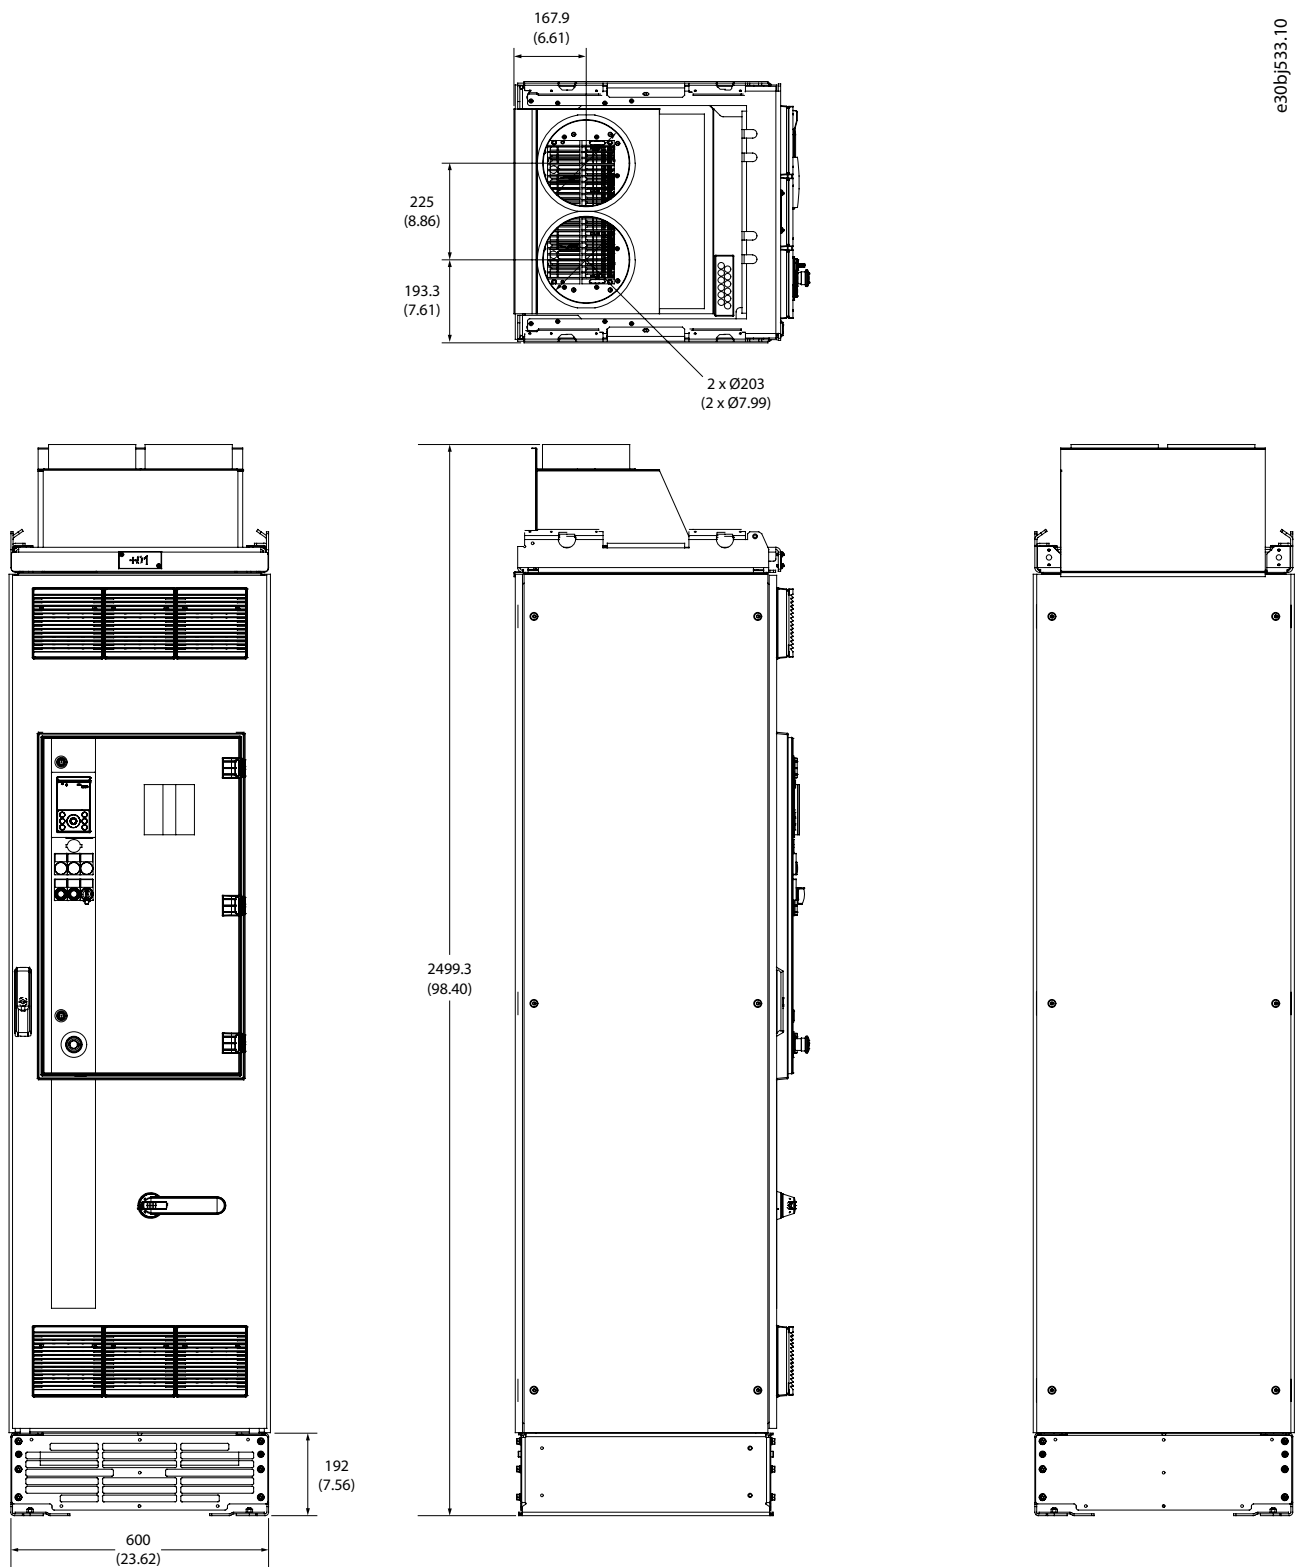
Dimensions for the Cooling Air Output Flange (+OAF), FE10, in mm (in)
